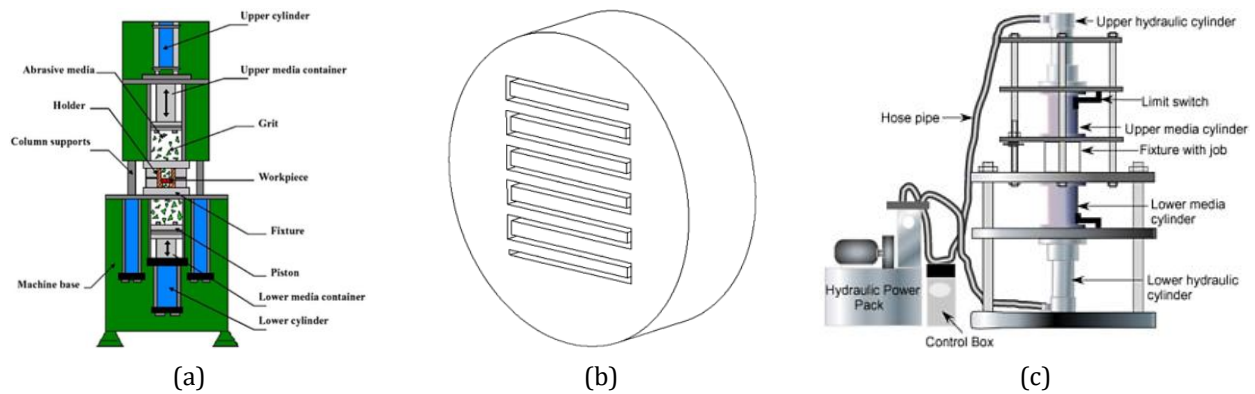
(a) Schematic diagram of experimental apparatus and microchannel (b) Workpiece [19], (c) Diagram of laboratory fabricated AFM set-up [26].
